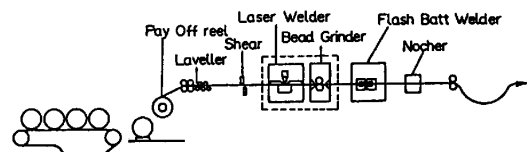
Layout of laser welder at entry section of pickling line
